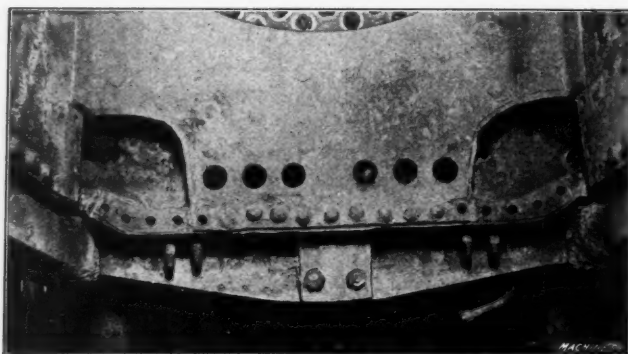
Fractured Mud-ring of Locomotive Firebox prepared for making the Welds
